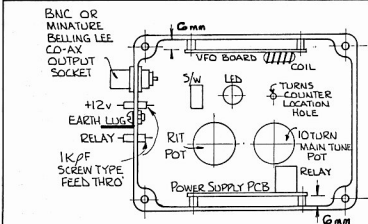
VFO/Power Supply. Placement of components and PCBs in 6908P DCB.
